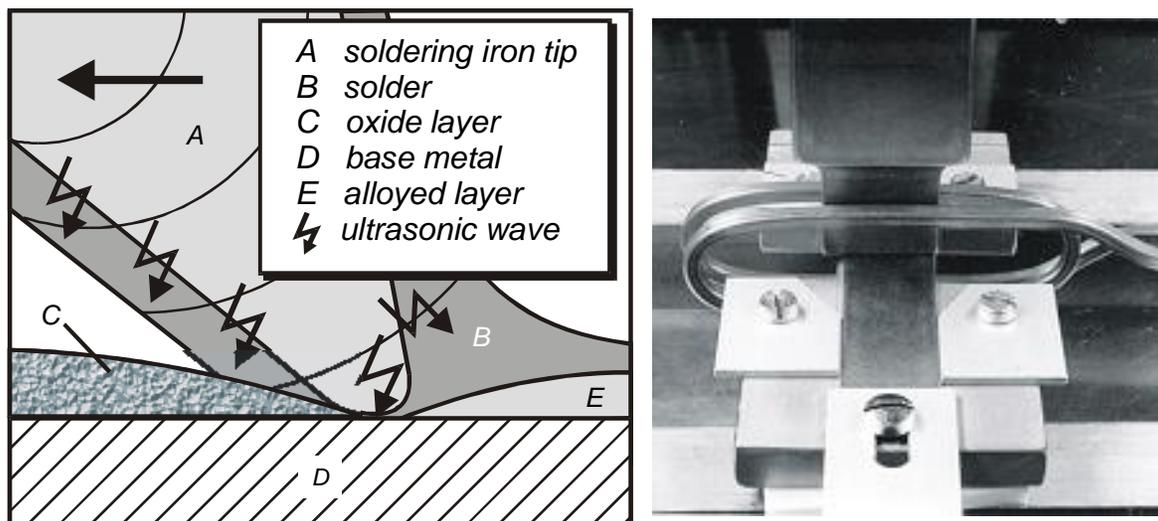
Ultrasonic soldering iron (left) and induction coil with horn (right)
